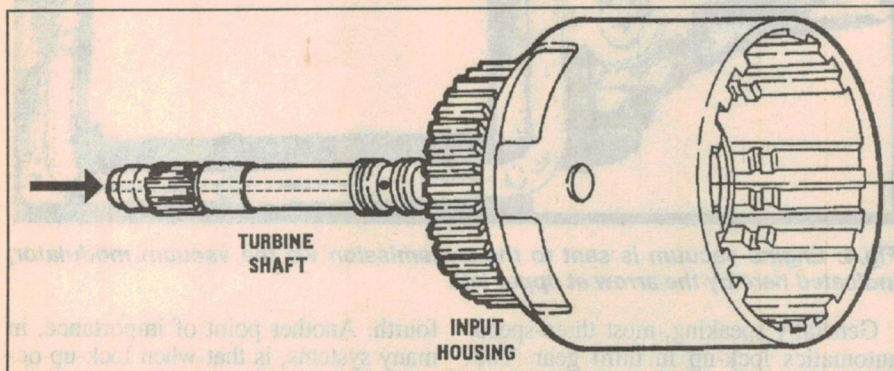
Fluid control of the lockup converter's clutch via the hollow stator shaft.
